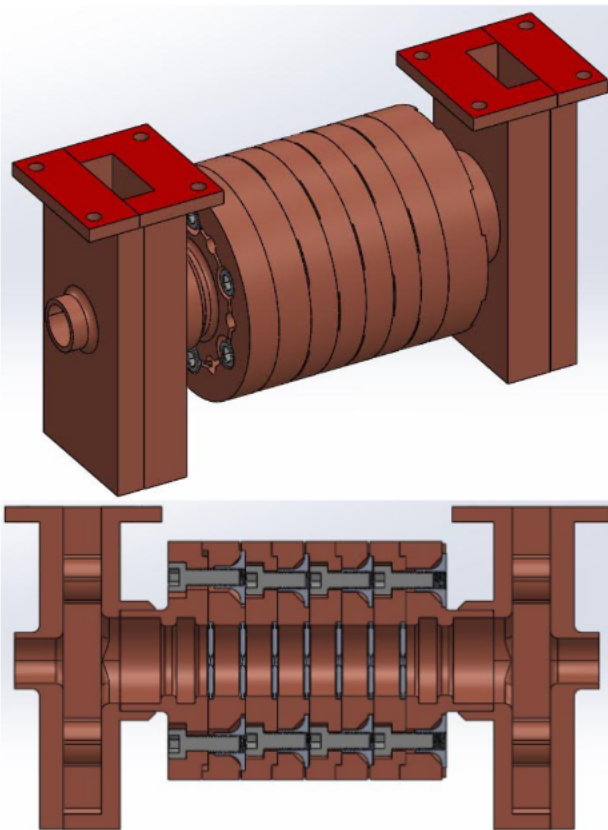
Engineering design of multi-cell DDA structure. Top - isometric view, bottom cutaway view.
